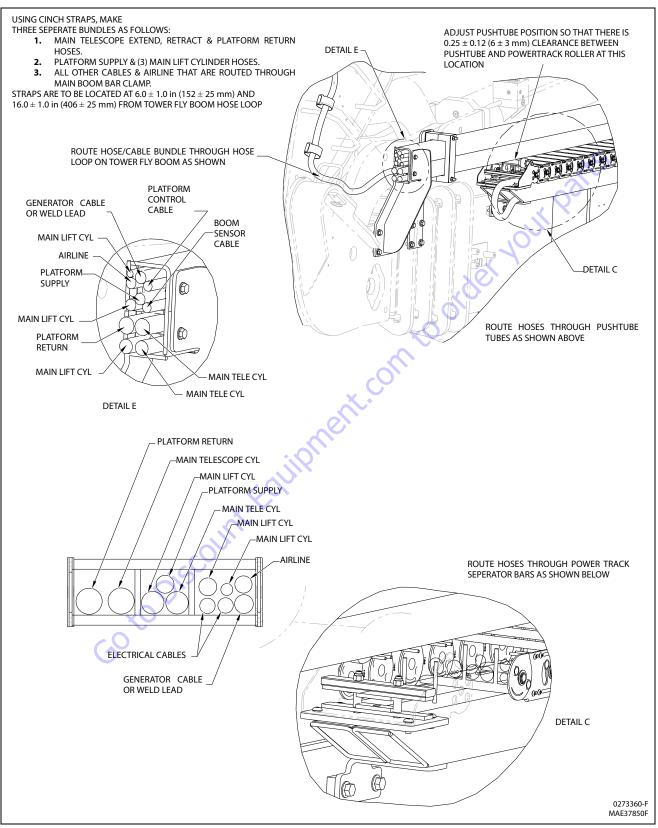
Tower Boom Powertrack Installation - Sheet 2 of 3
